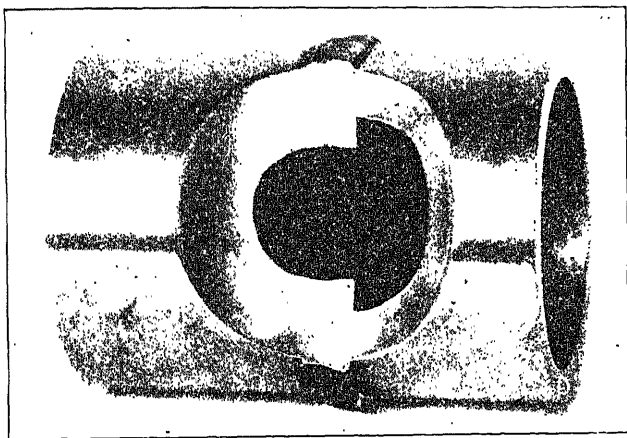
Piloted Cup Automatically Welded by Metallic-Electrode Arc Process to Tube to Form 75-MM. Shrapnel Shell.
